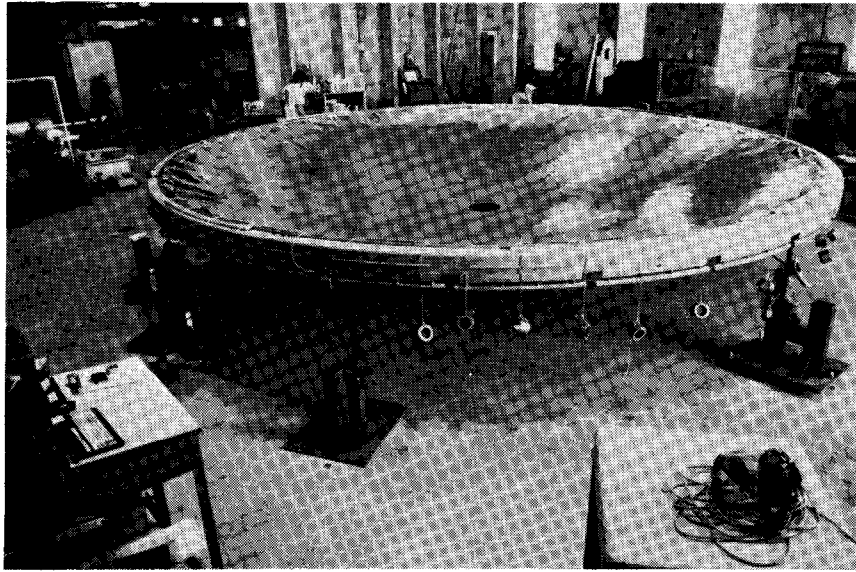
7-M Membrane Unrolled onto Dish Ring During Final Field Assembly.
